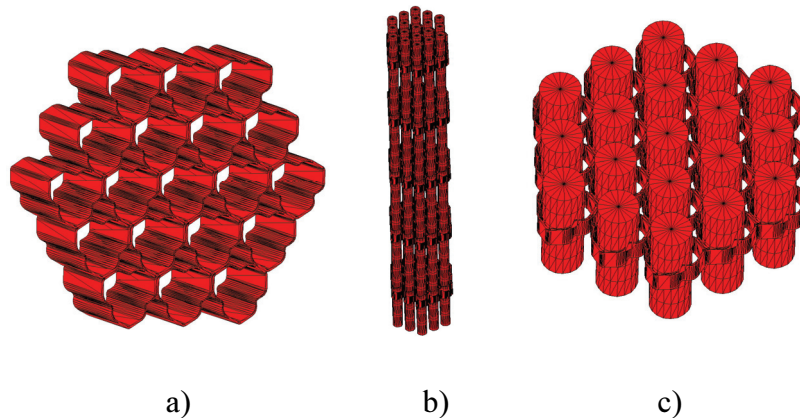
A grid spacer: a) isometric view; b) fuel assembly from 19 rods and 5 grid spacers, c) fragment of fuel assembly with grid spacer.
